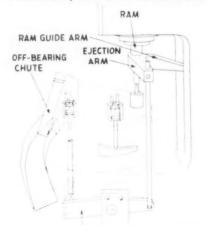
Operator loads a square-shank bolt and an insulator holder into each fixture as it rotates to front of the six-station index table on this 25-ton Denison Multipress. Parts are automatically positioned under the ram, assembled, and per hour.
